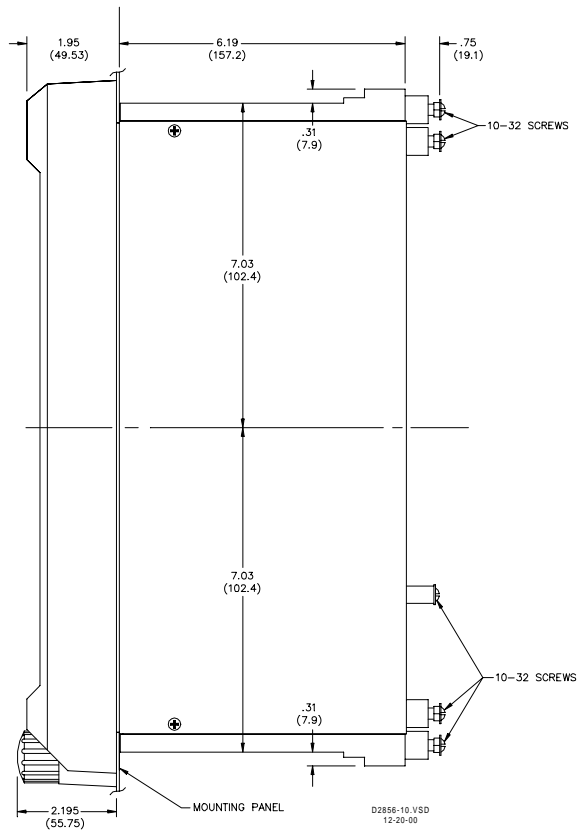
M1 Case, Double-Ended, Semi-Flush Mounting, Outline Dimensions, Side View
